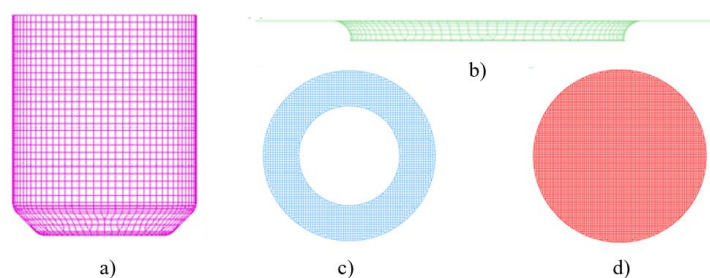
Mesh model of the working components: Punch (a), die (b), blank holder (c). Blank (d)
